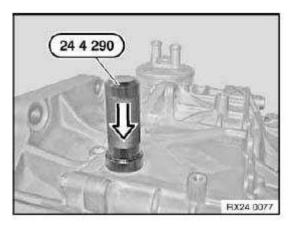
Identifying Special Tool (24 4 290) Courtesy of BMW OF NORTH AMERICA, INC.
